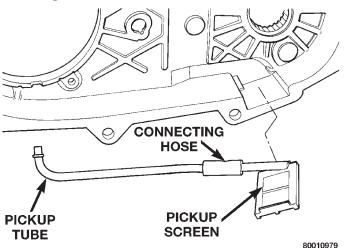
Oil Pickup Screen, Hose And Tube Removal FRONT SHAFT/DRIVE CHAIN/POPPET REMOVAL
